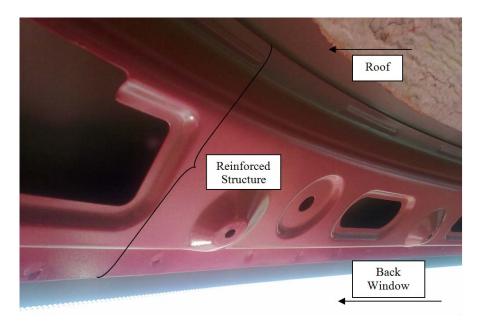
Reinforced Structure at the Small Passenger Vehicle's Roof Edge.
